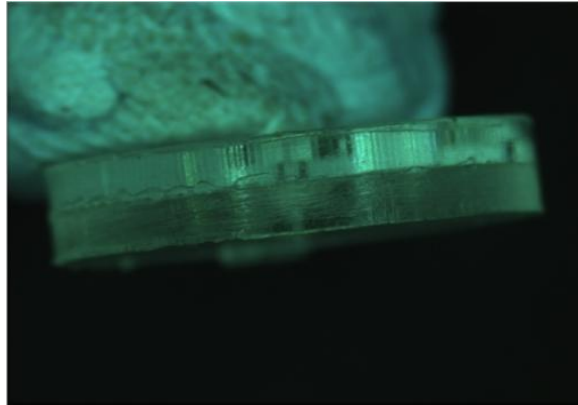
Two PMMA layers welded by ultrasonic welding (Image courtesy of Daniel Smale, University of Nottingham)
